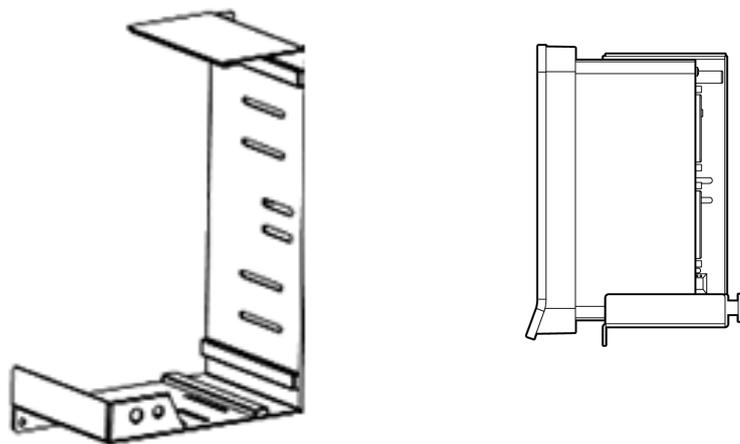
Flow-X/C mounting bracket and side view Flow-X/C installed
